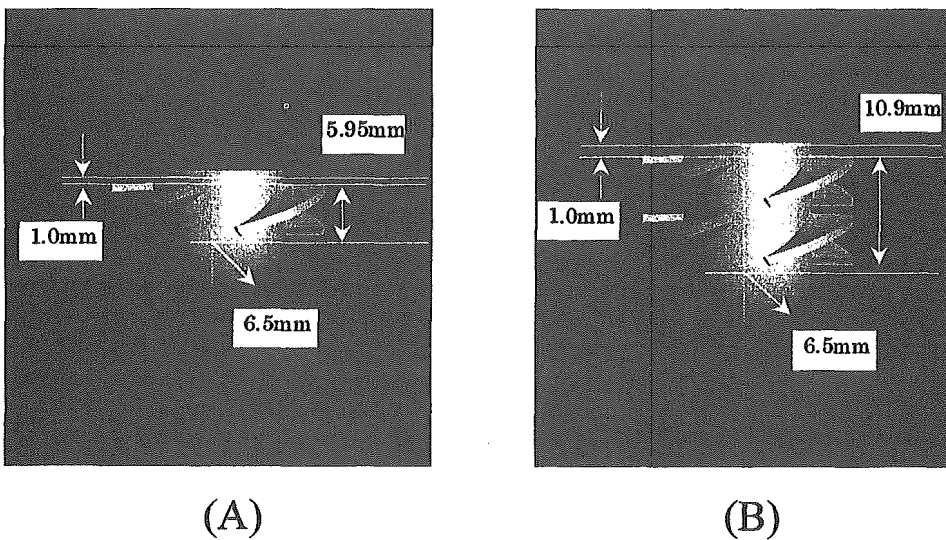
The drawing shows the design of the impellers: (A) 4-vane impeller, (B) 4-vane 2-stage impeller.
